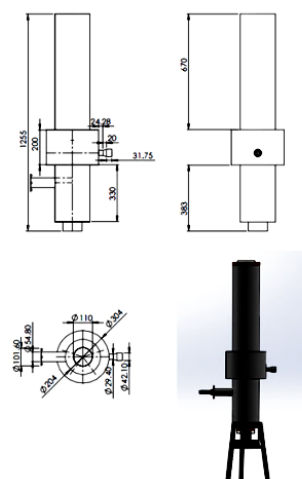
Dimensional drawing of downdraft gasifier (swirl air type), units in mm., designed by Arpakorn Wattana & Pipatpong Watanawanyoo for the current study.
